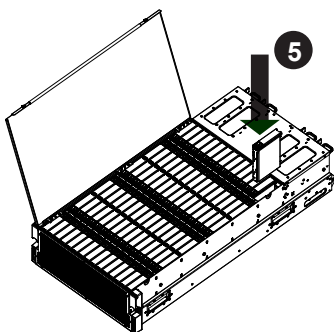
Installing the Hard Drives and Carrier into the Chassis
